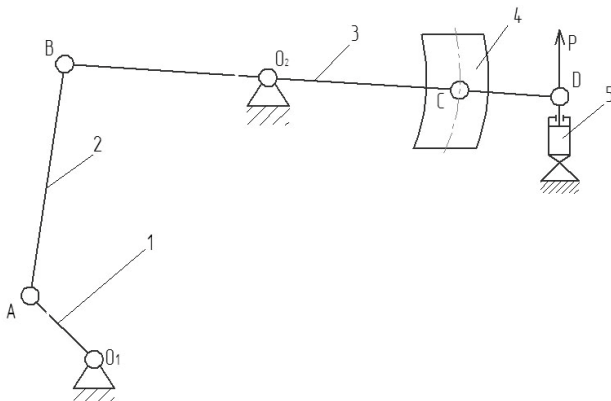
Generalized scheme of the mold oscillation mechanism: 1 - cam gear, 2 - rod, 3 - oscillation table, 4 - mold, 5 - pneumatic shock absorber
